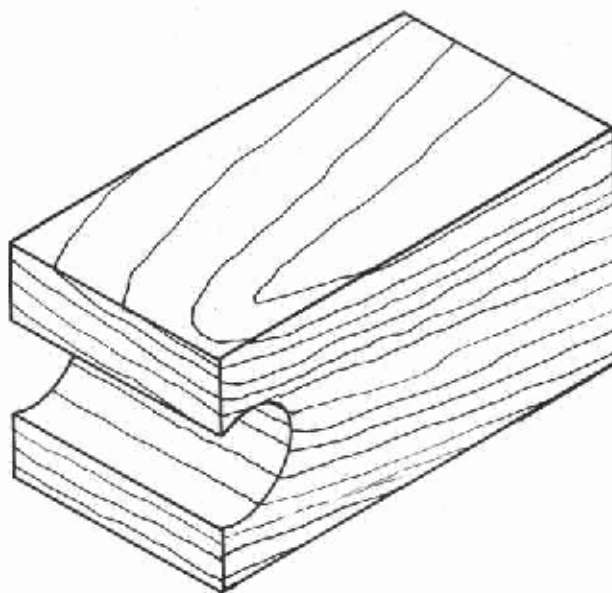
Final cut being made on the block shear specimen. Saw height is adjusted to cut into but not beyond the first cut.
